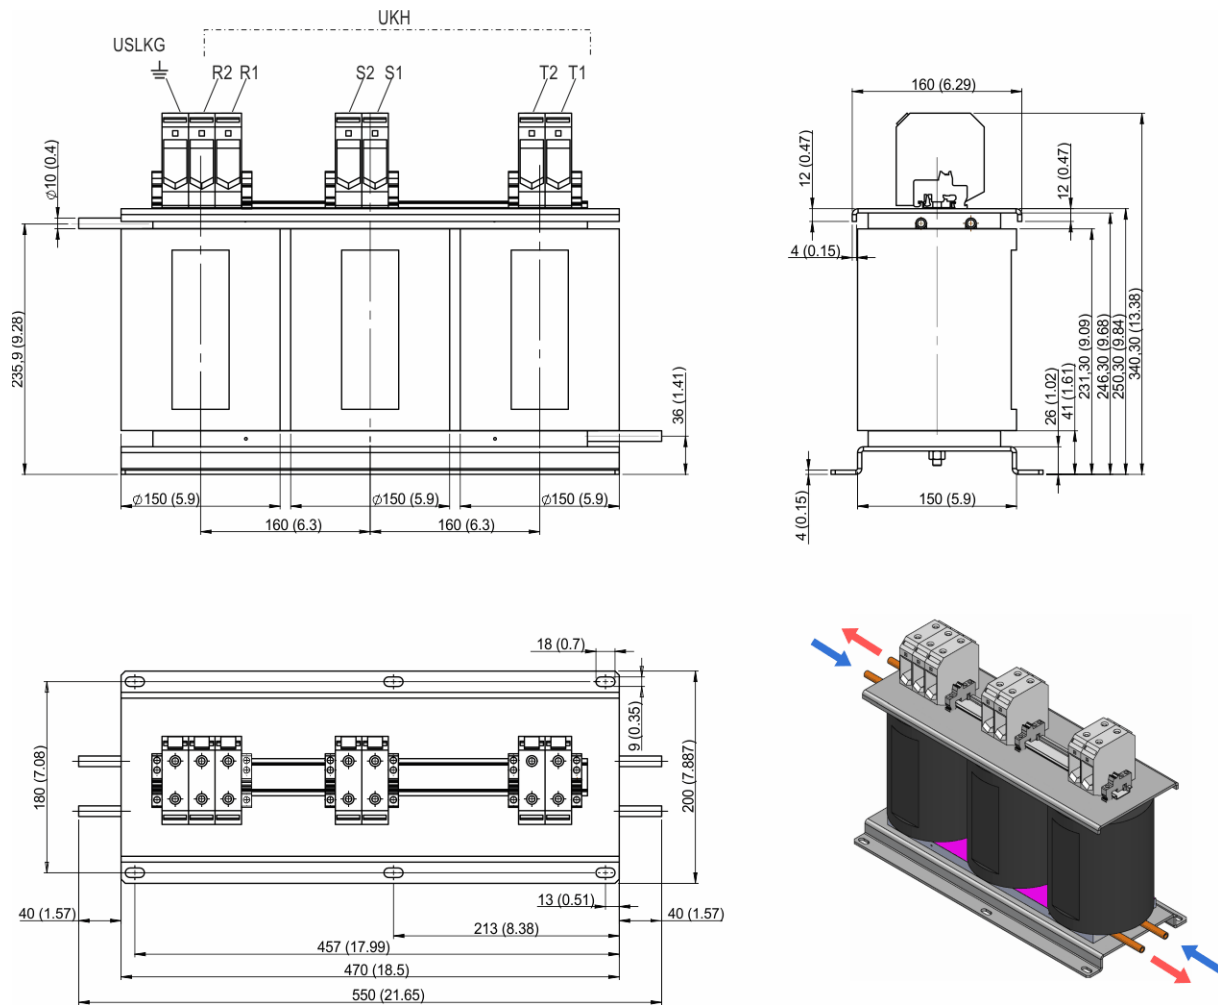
Dimensions of the choke module 02171400 in mm (inch)
